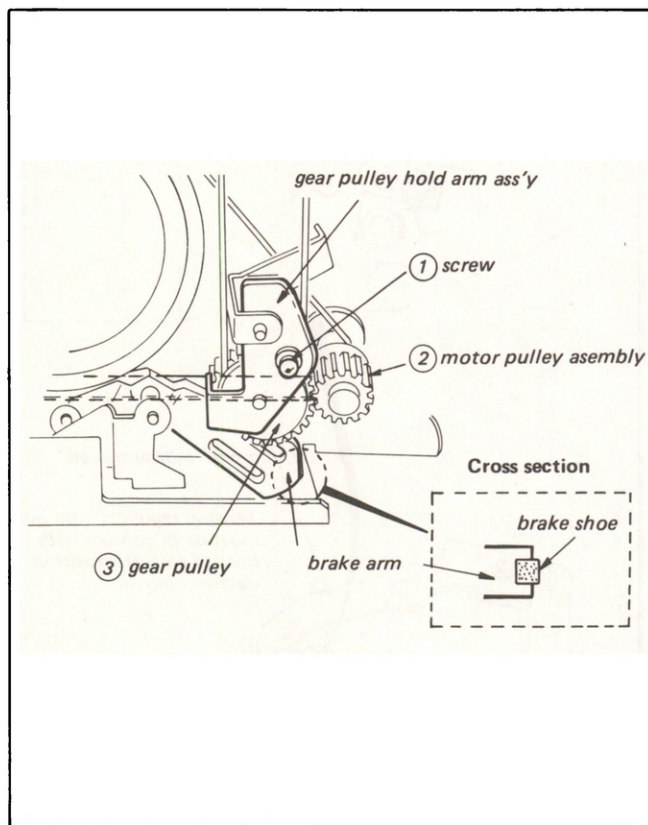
Position adjustment of gear pulley hold arm assembly
